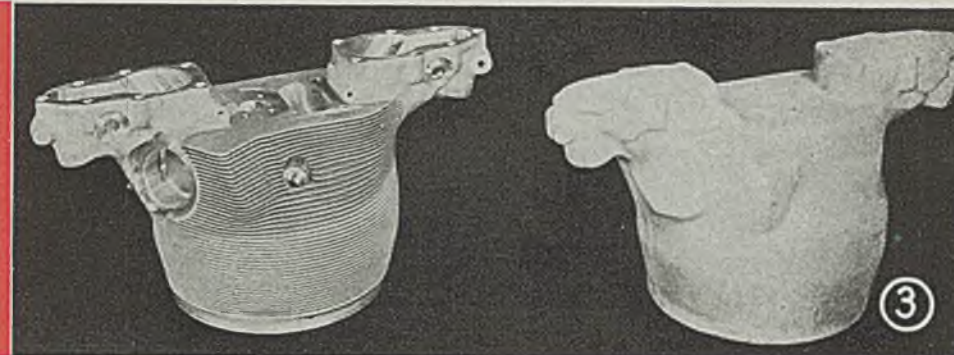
Left, finished cylinder head, and shown at right, forged head
